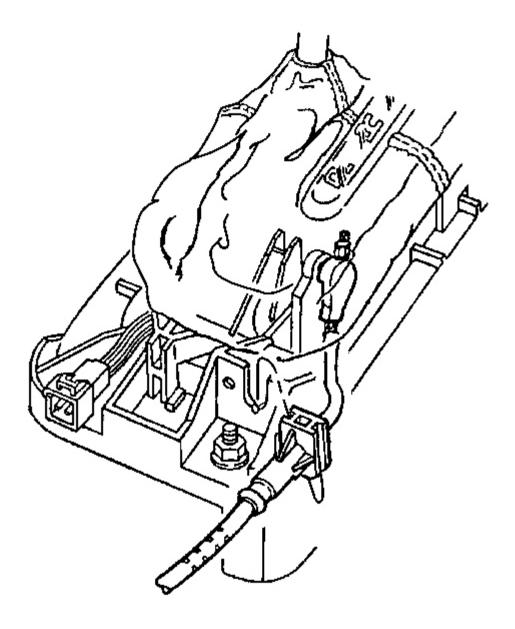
Park/Lock Cable & Shift Control Slot Courtesy of GENERAL MOTORS CORP.
